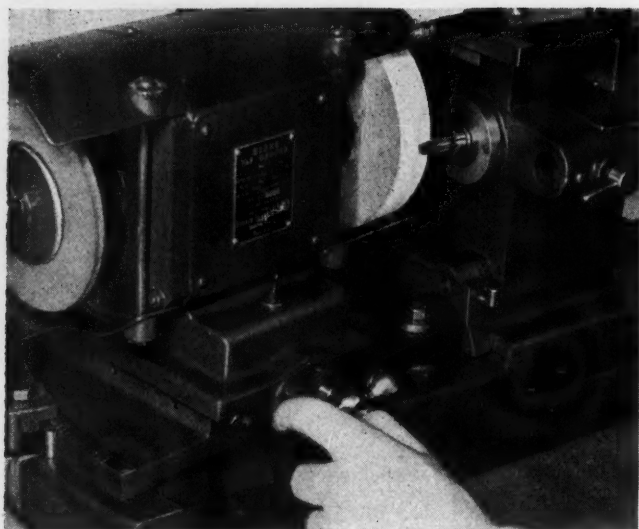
Tap-grinding machine with tilting work - holding unit. Taps with any number of flutes from two to ten can be ground in this machine.
